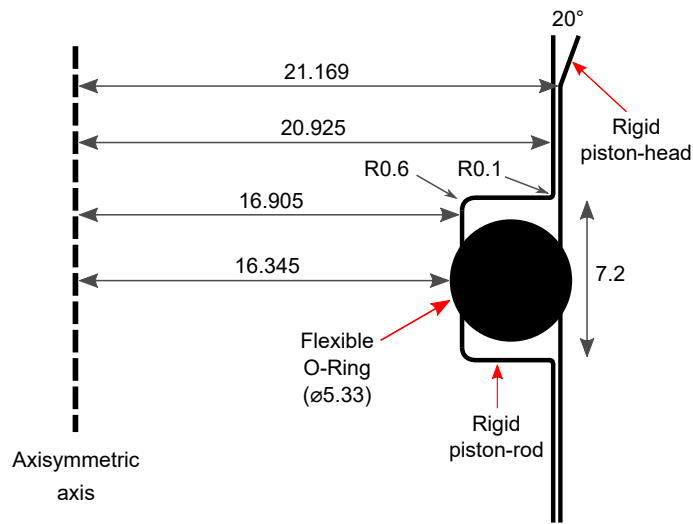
Radial O-Ring and piston geometry (dimensions in millimetres)
